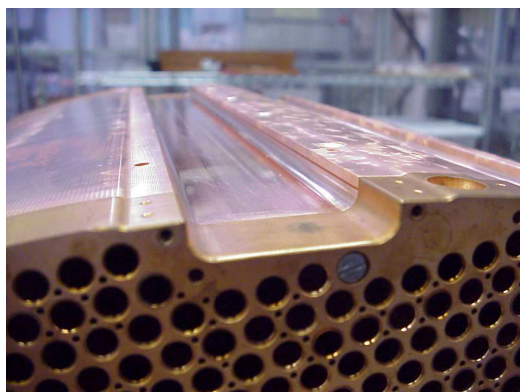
Photo showing endplate and outer cladding plate with cut out for cable trough.
